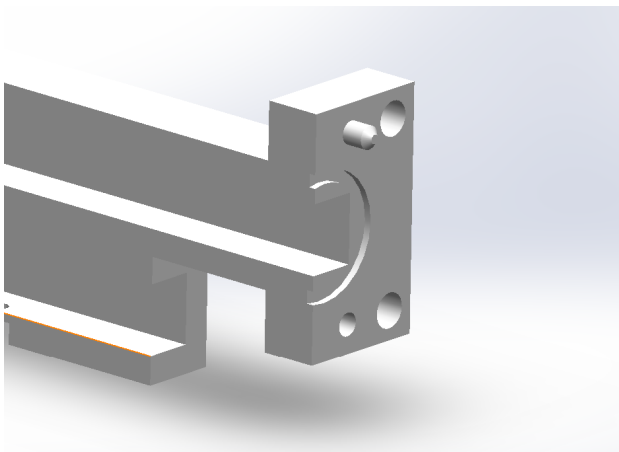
A cross-section of the flange designed for the scaled and 3D printed directional couplers. This flange features an O-ring groove and alignment pins.
